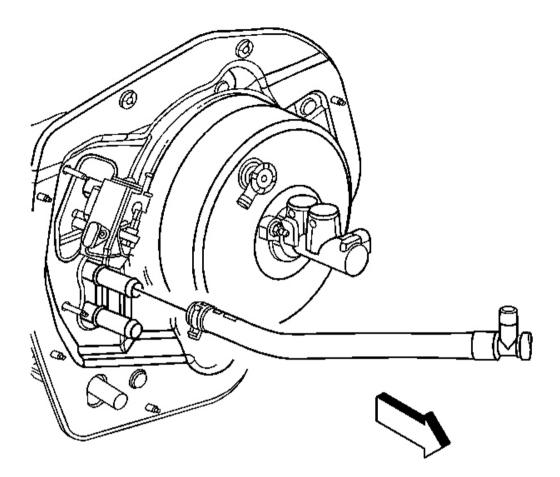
Heater Outlet, Hose Clamp & Heater Core Courtesy of GENERAL MOTORS CORP.
